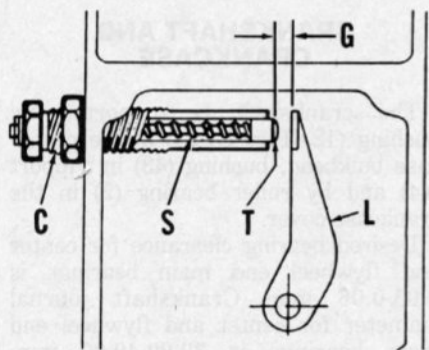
View of torque control screw. Refer to text for adjustment.
